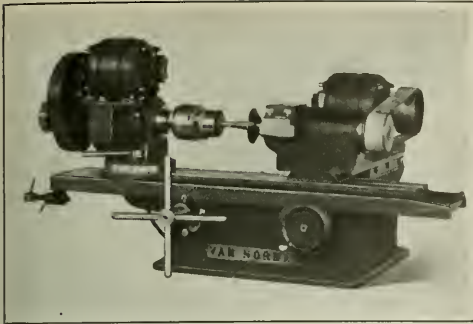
An Internal Grinding Operation performed by attaching a Small-wheel Arbor to the Wheel-spindle
